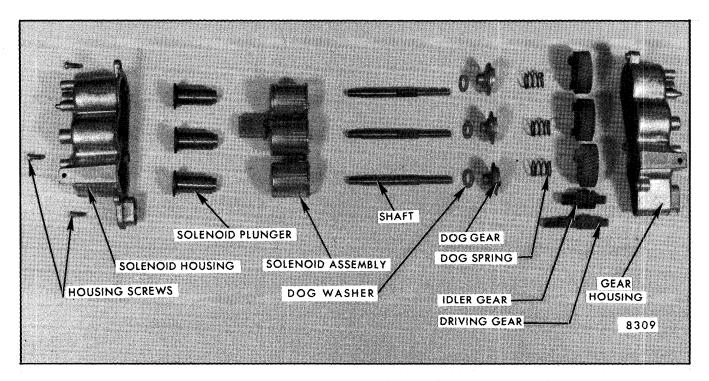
Six-Way Seat Adjuster Transmission Component Parts
